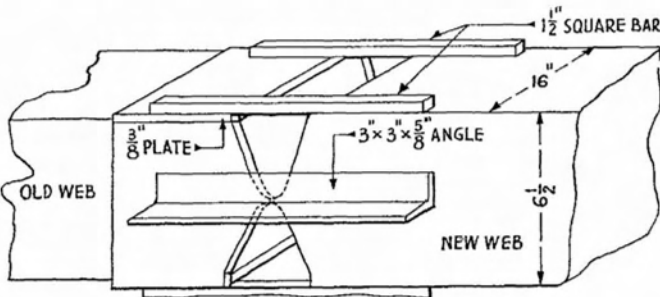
ISOMETRIC SKETCH OF SET UP FOR WELDING.
